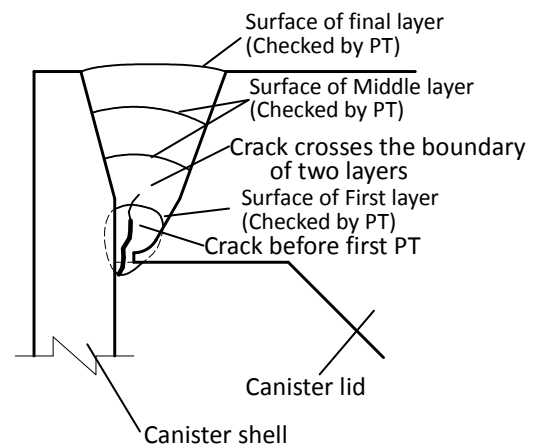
Schematic diagram of a crack on the stainless steel weld
